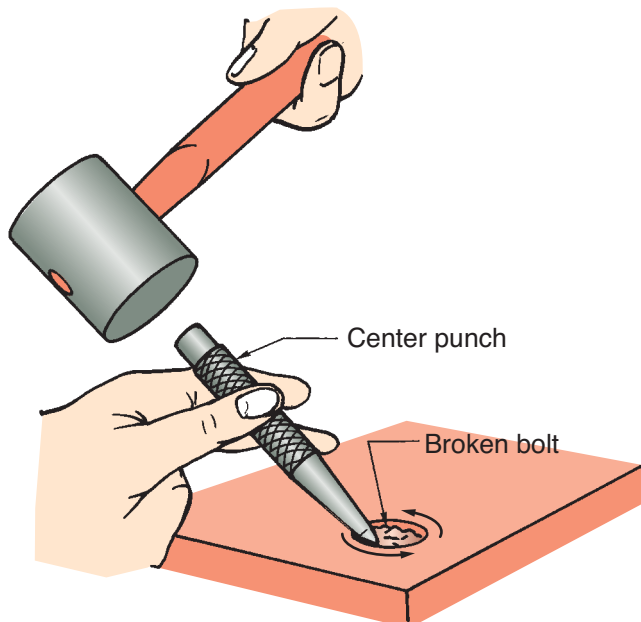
Try to remove a broken fastener off flush first by using a sharp punch or chisel and a hammer.
